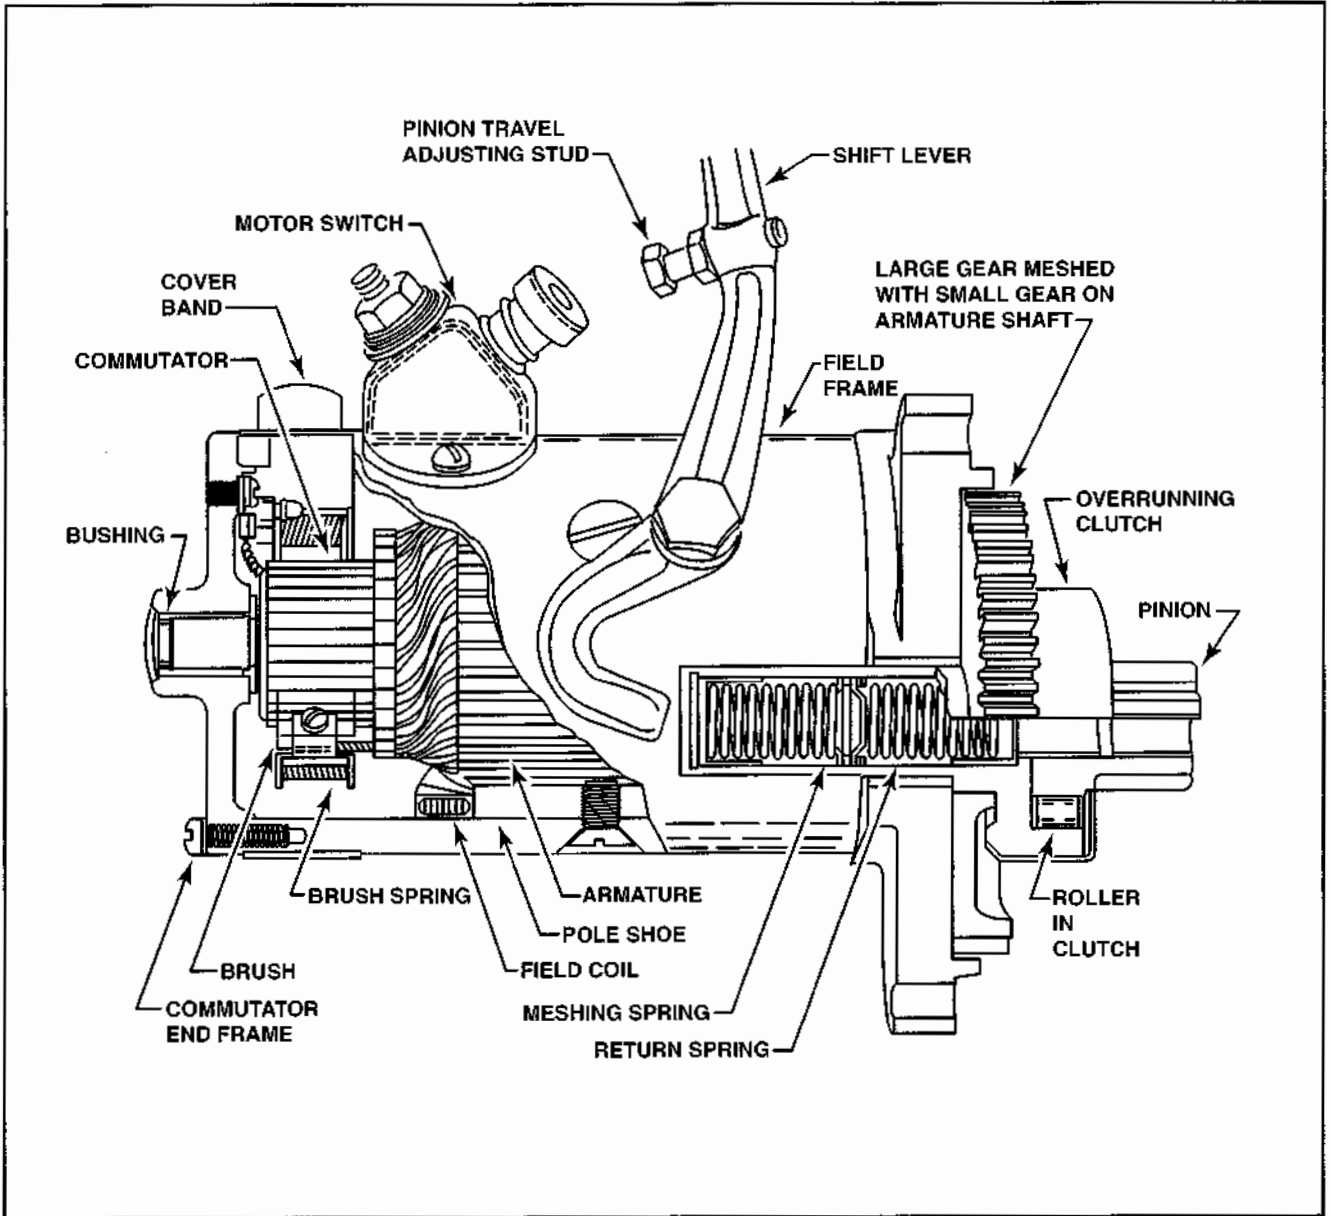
Some small, horizontally opposed aircraft engines use a direct-cranking starter with a small DC motor to drive an over-running clutch. The over-running clutch drives a pinion, or drive gear, that turns the engine.
